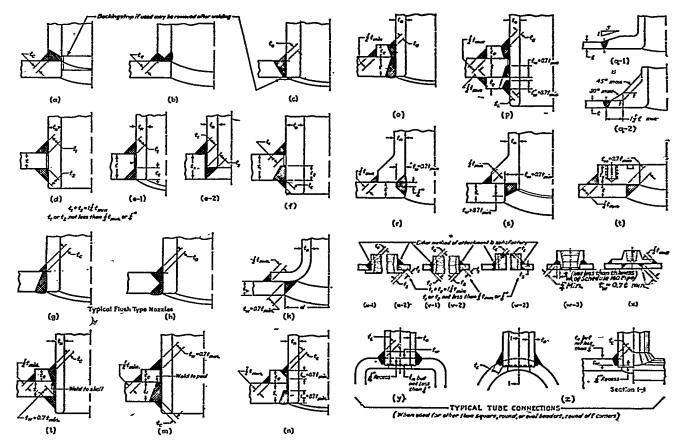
(d)-Acceptable types of welded connections to drums and headers.
